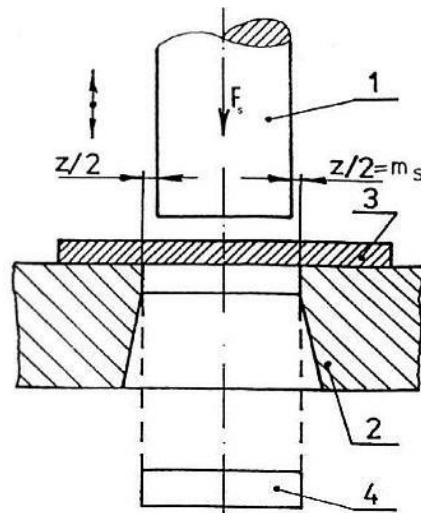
Shearing tool, z – die clearance, m_s -blade gap, 1. Shearing punch, 2. Shearing die, 3. sheared material (sheet strip), 4. Sheared material (blank)
